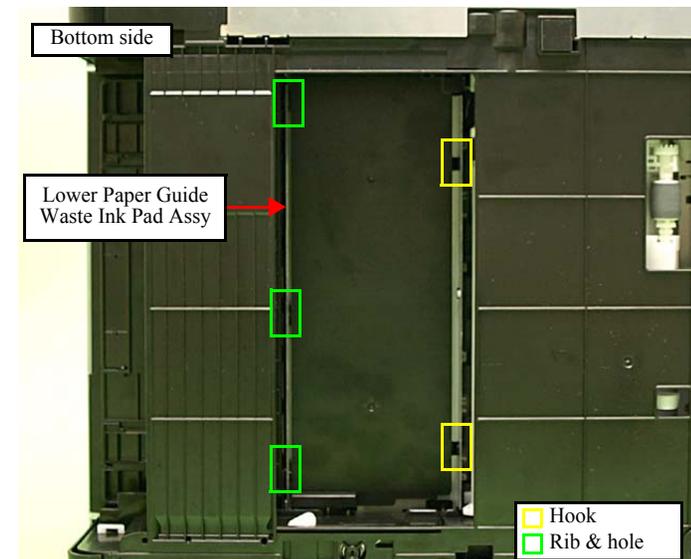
Removing the Lower Paper Guide Waste Ink Pad Assy
